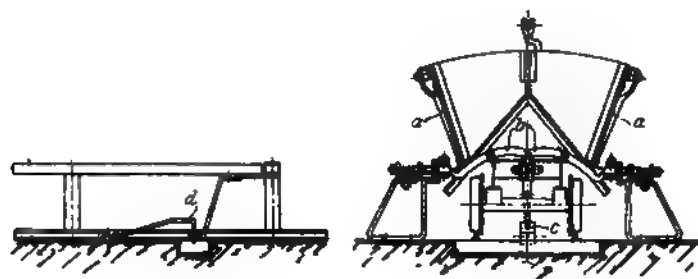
and 426. Rope Haulage Plant at the Röchling Iron and Steel Works, Völklingen, Saarbrücken.
